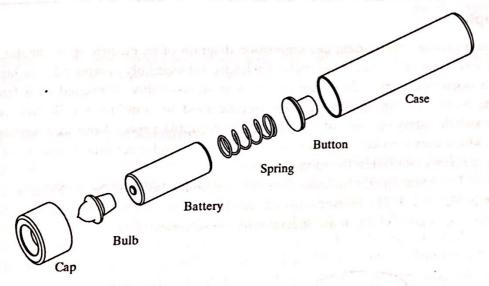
Assembly drawing of penlight showing standard and special-purpose components.
